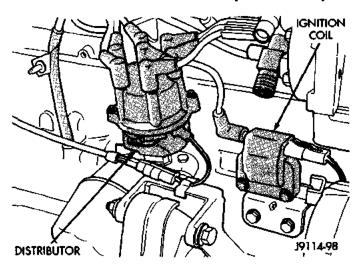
Ignition Coil—Typical (4.0L Engine Shown)
